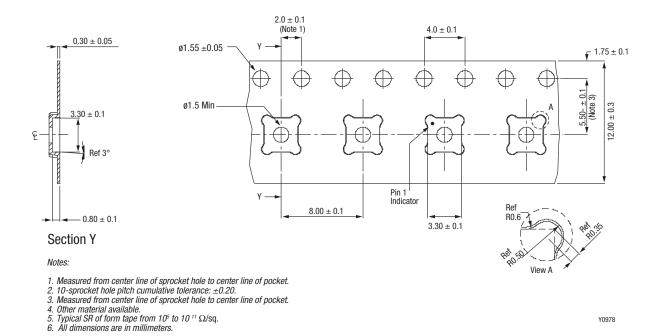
SE2611T 20-Pin QFN Carrier Tape Dimensions
